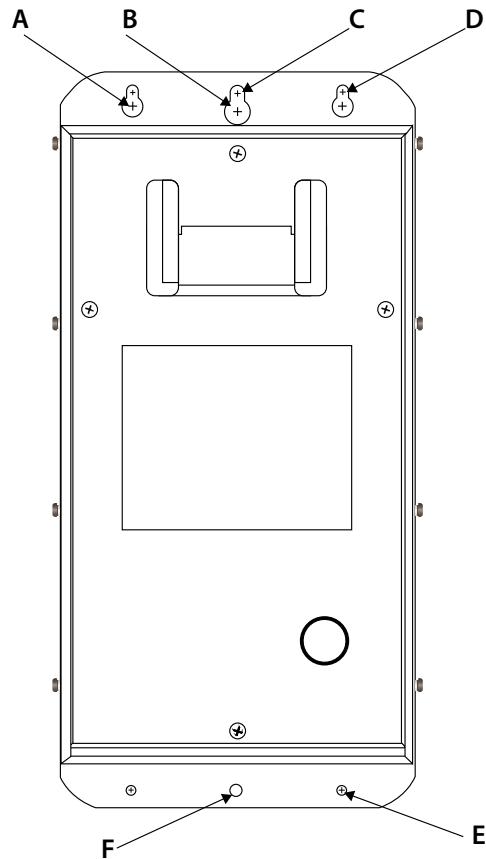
SubDrive Solar Controller Mounting Hole Drawing
